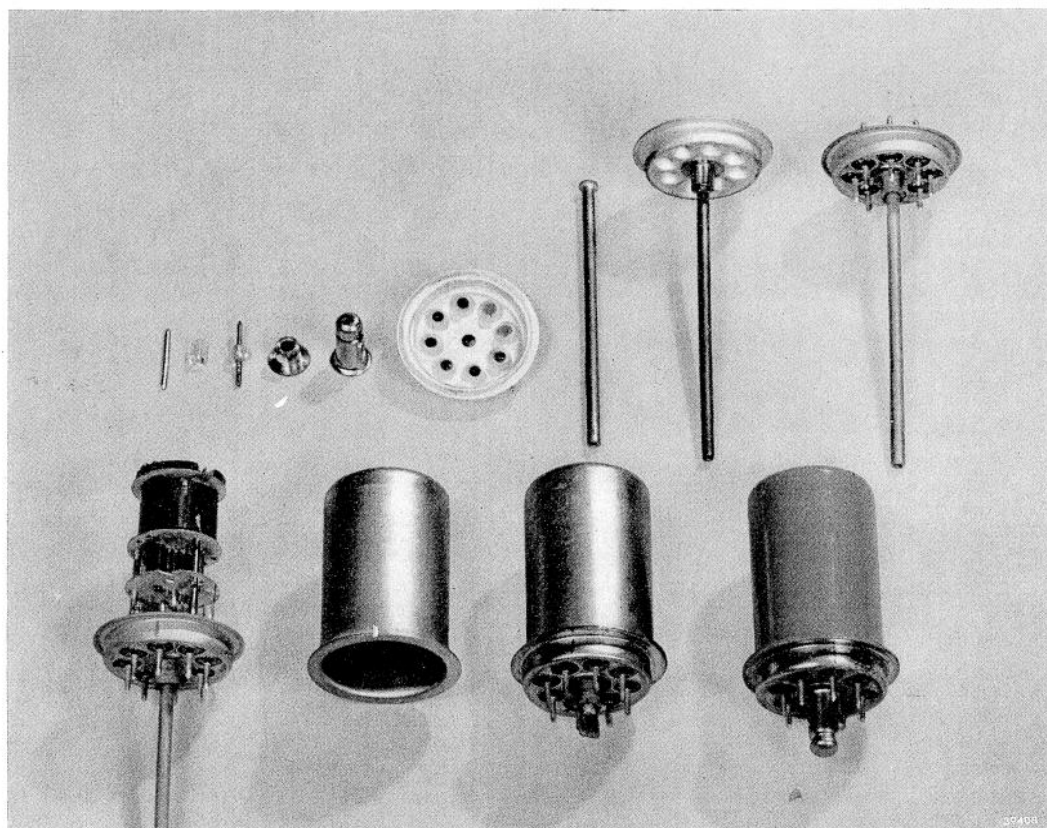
The parts of the metal key valve in different stages of manufacture. Upper row, left to right: one of the 8 fused-in leads; glass tube to make bead; bead fused on pin; "cap" upon which the spigot is later welded; spigot; metal base plate with holes; metal exhaust tube; combination of base plate, exhaust tube and cap complete the base plate with fused-in pins. Lower row: electrode system assembled and mounted on the pins; metal envelope; valve after being exhausted and finally the completed valve.
